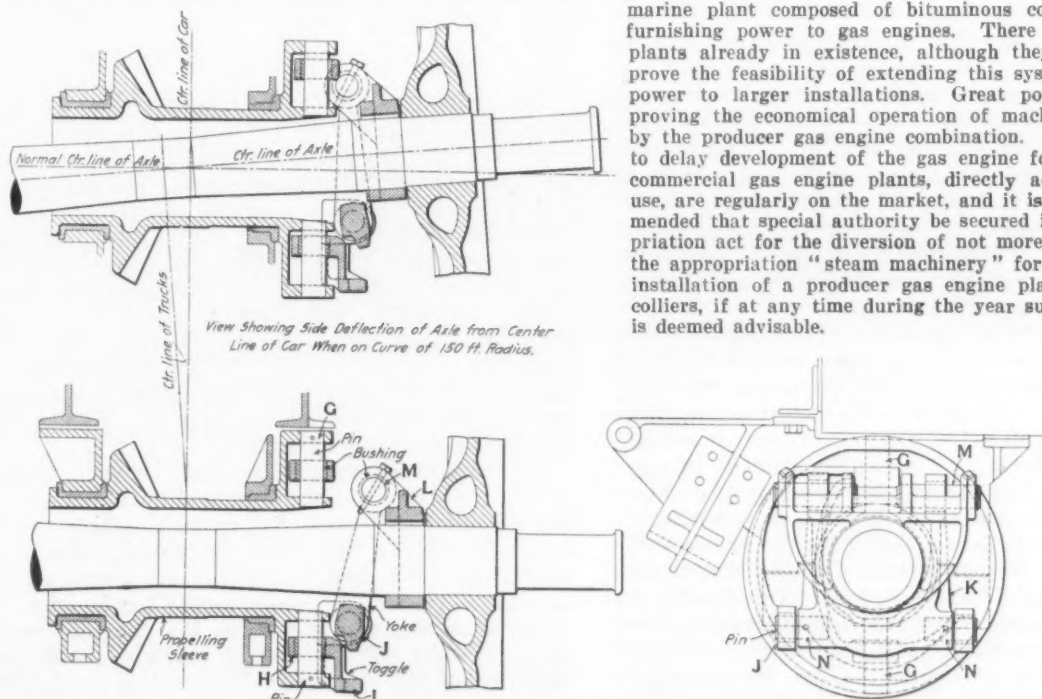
Sections and End View of the Universal Joint Between the Propelling Sleeve and the Axle.
